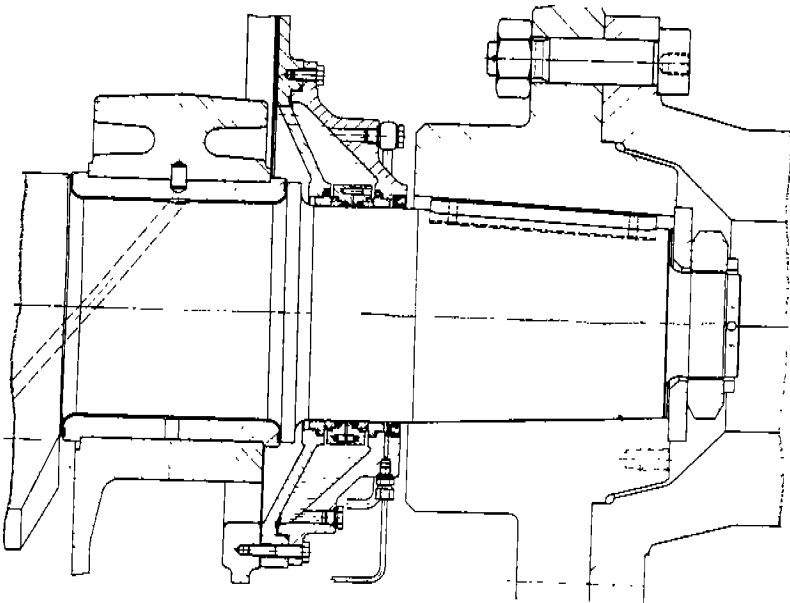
Gas-tight sealing of Crankshaft between Crankcase and Environments.
